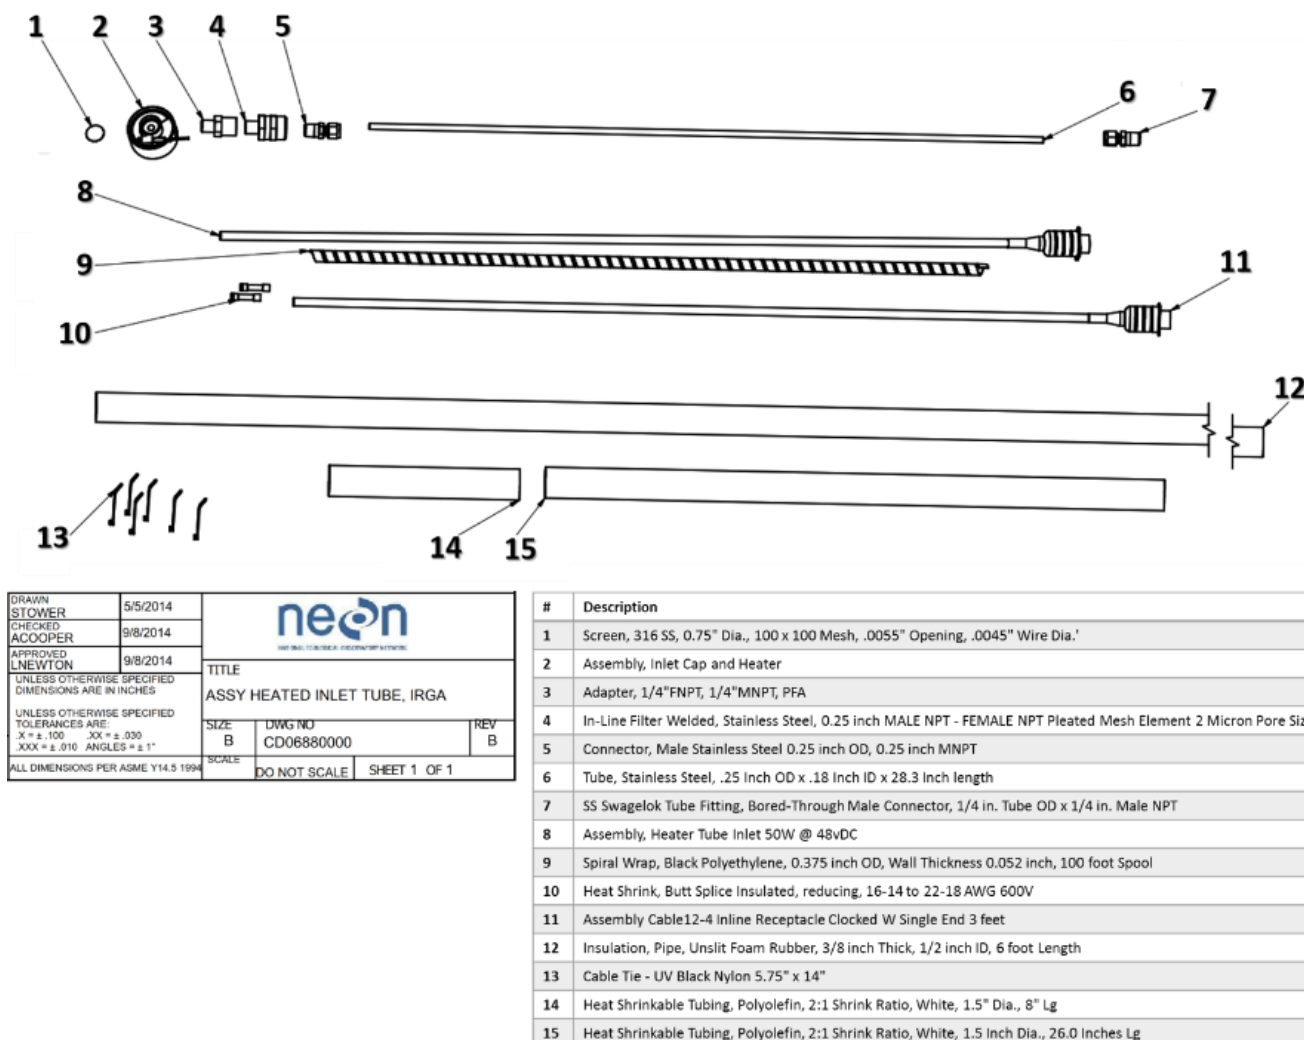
ECTE IRGA Heated Air Inlet Exploded View and Build of Materials.
